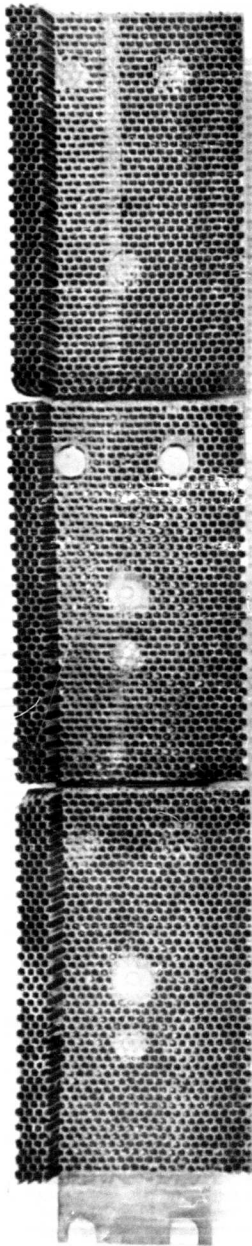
BUCKET SHROUD RUB IN HONEYCOMB SEAL
